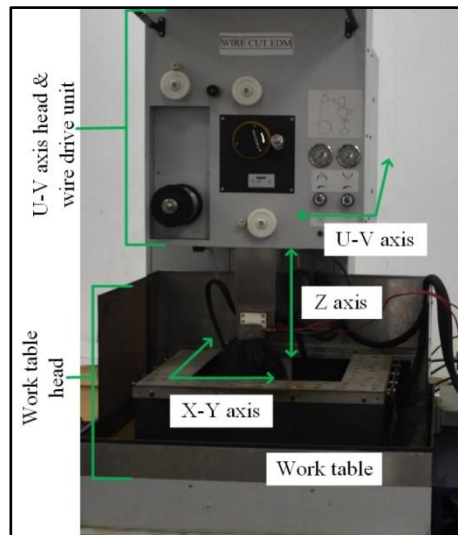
Photographic views of the worktable head and X-Y-Z-U-V axis assembly
